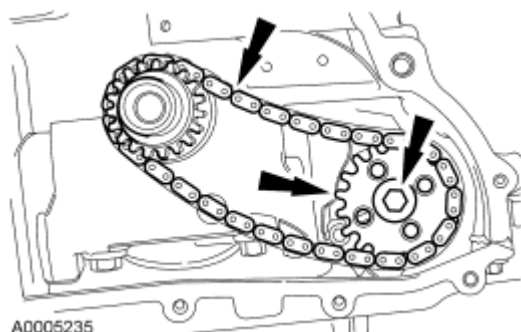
Locating Oil Pump Chain, Sprocket & Bolt
